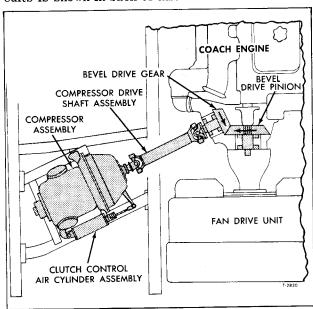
Compressor Drive Shaft and Accessory Drive Layout (Typical)
